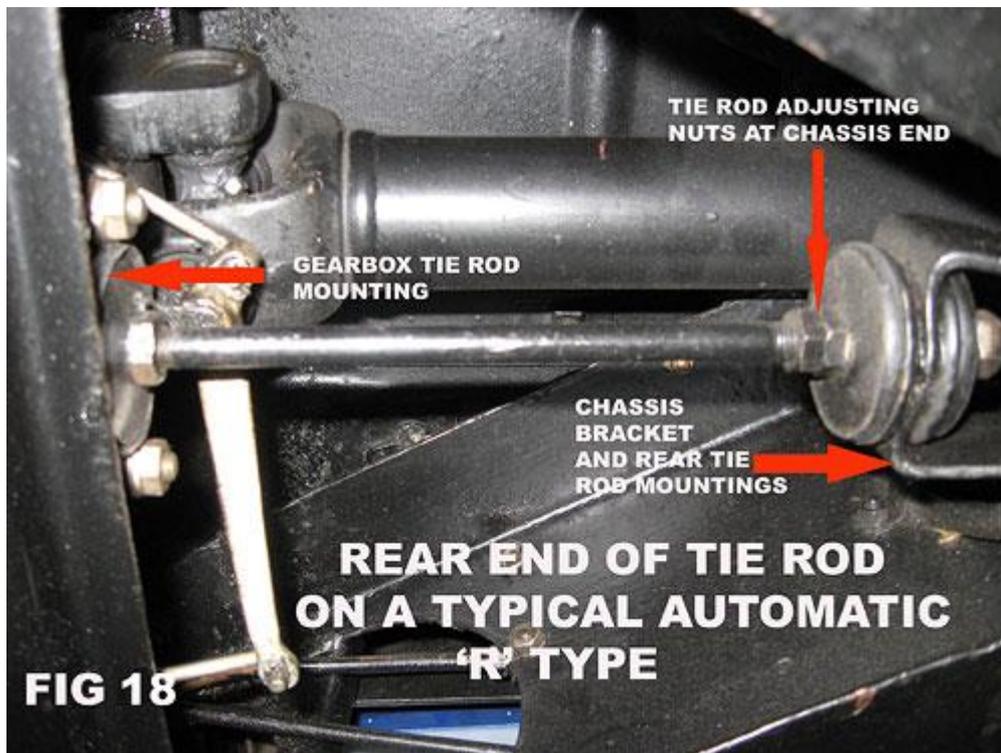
The rear end of the tie rod, showing the adjustment nuts at the chassis end
